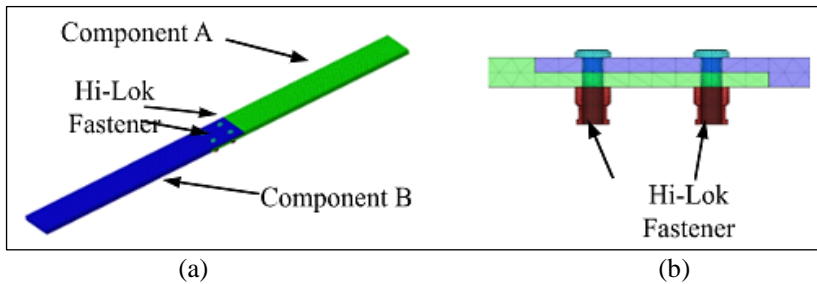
(a) 3D CAD model of the assembled components with Hi-Lok fasteners, (b) side view of the Hi-Lok fasteners
